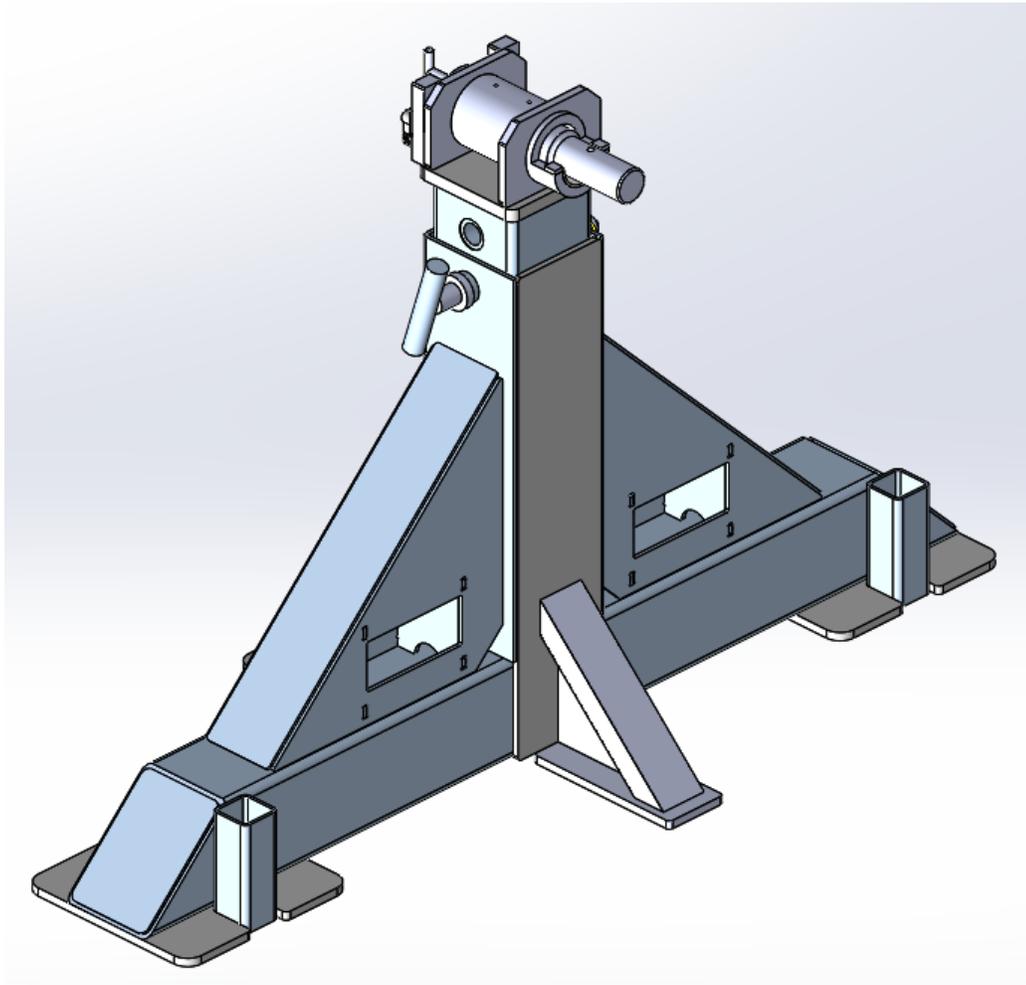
Final Design of Quick Change, Hydraulic Powered Drive End A-Stand, Inboard Side
